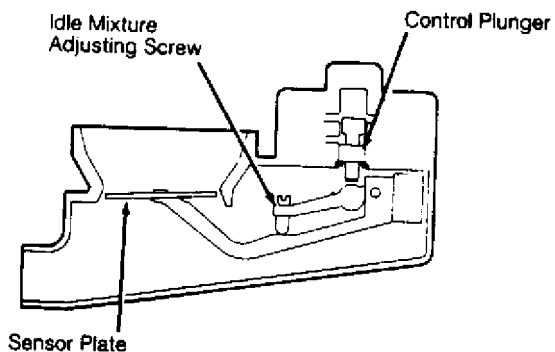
Identifying Airflow Sensor Components (Fox & Jetta GLI)
